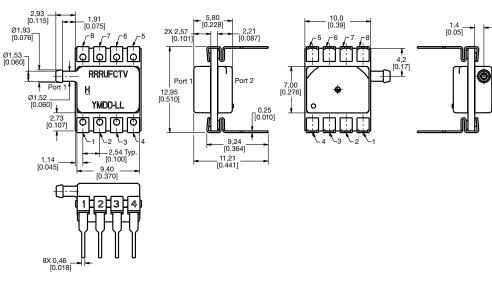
DIP PACKAGE DIMENSIONAL DRAWINGS (CONTINUED)
